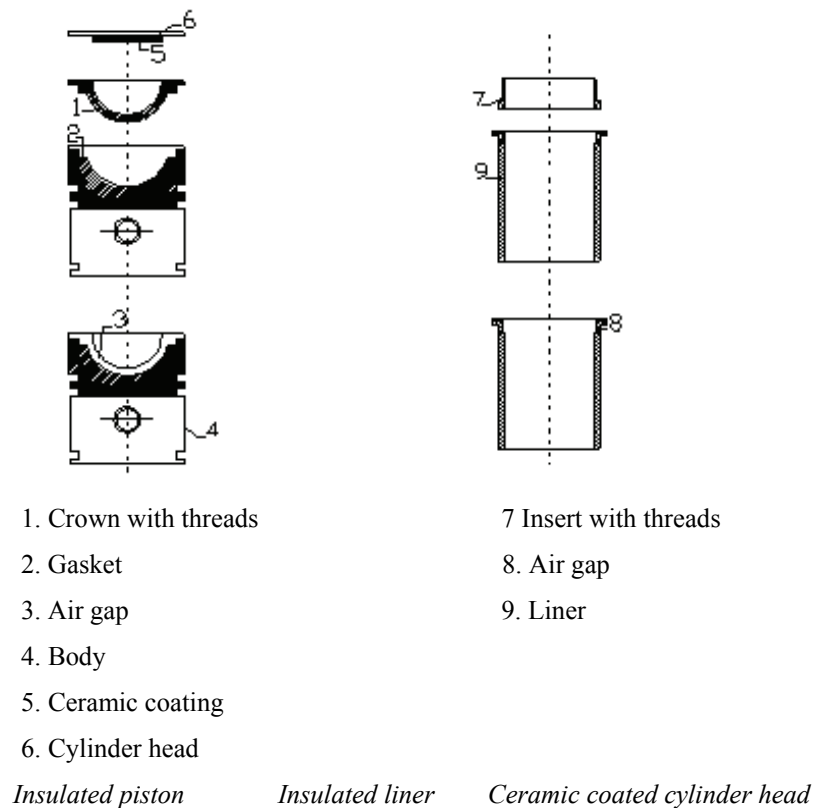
Assembly details of air gap insulated piston, air gap insulated liner and ceramic coated cylinder head
